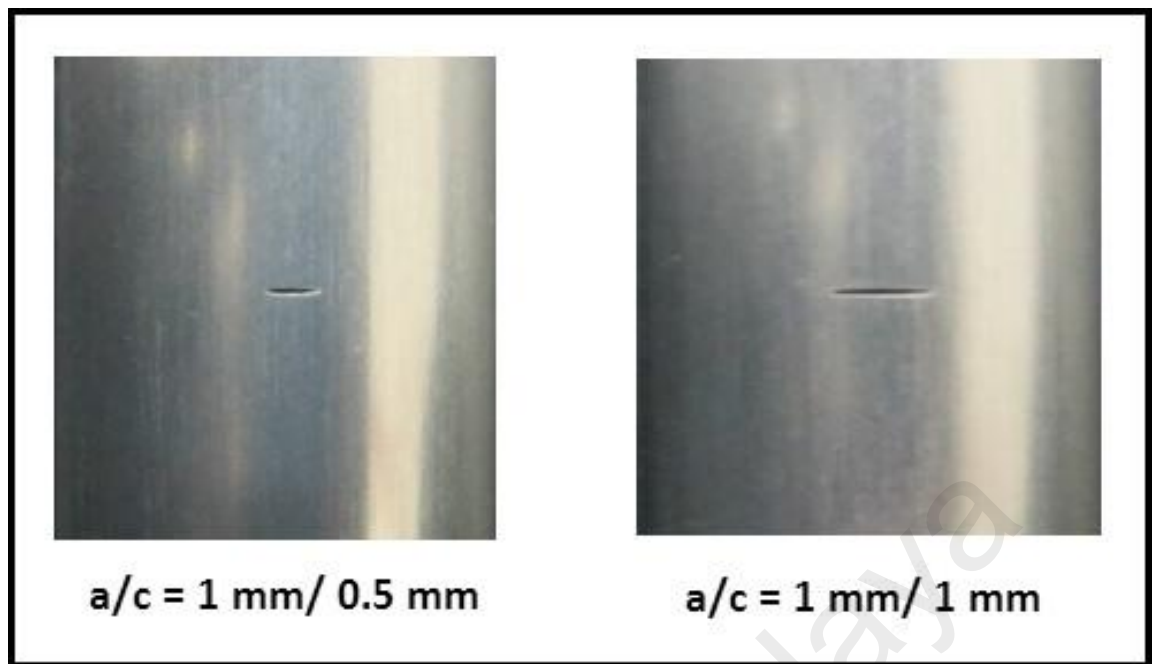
Cracked specimens prepared using the die-sinking EDM machine.
